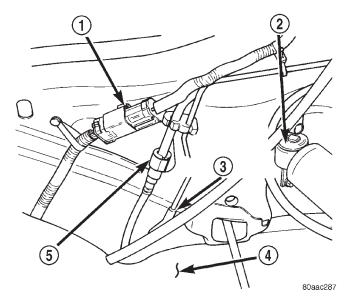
Fuel Tank Connections at Front of Fuel Tank
